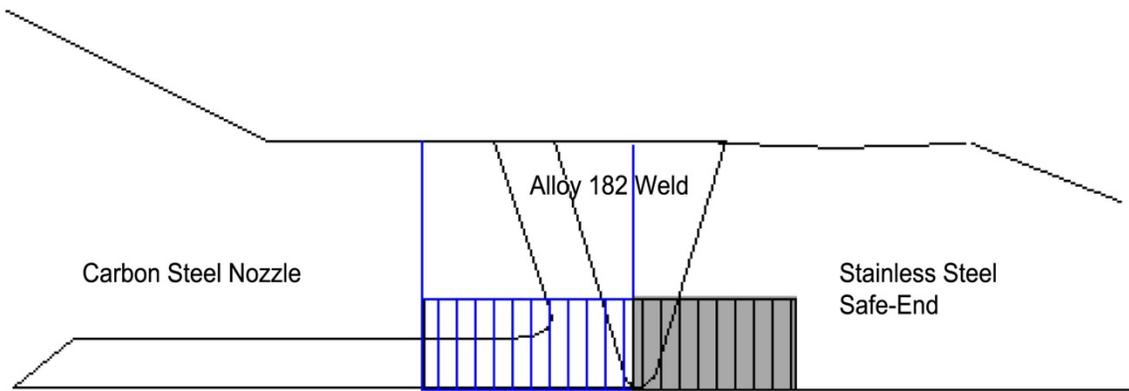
Pressurizer Spray Nozzle Weld Circumferential Scan CRV Coverage Assessment
